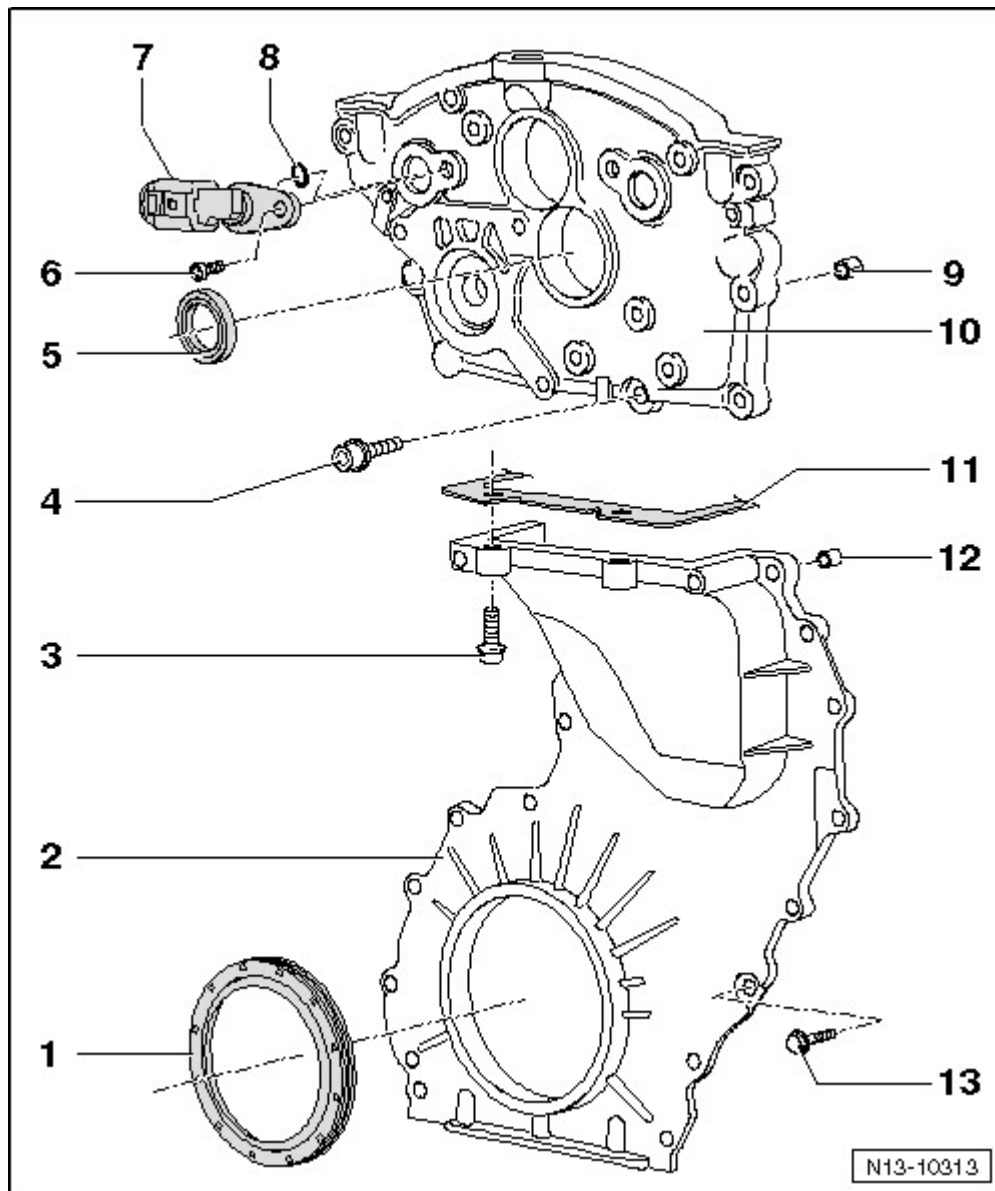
Identifying Timing Chain Cover And Sealing Flange Overview
